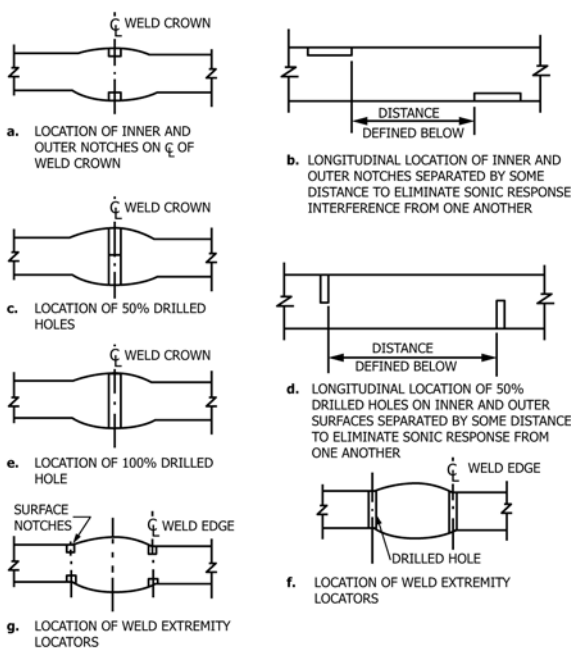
Typical Notch Locations for Fusion Welded Pipe
